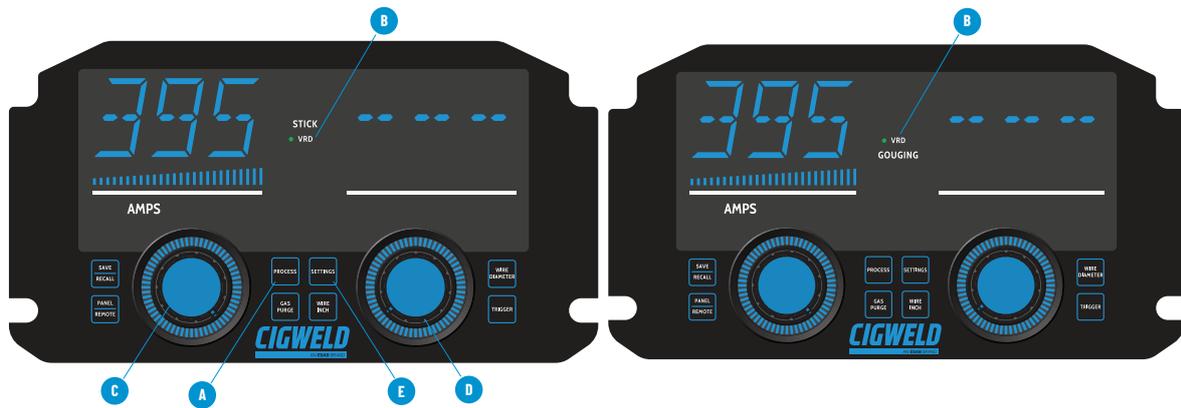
Setup for STICK (MMAW) Welding and Gouging
